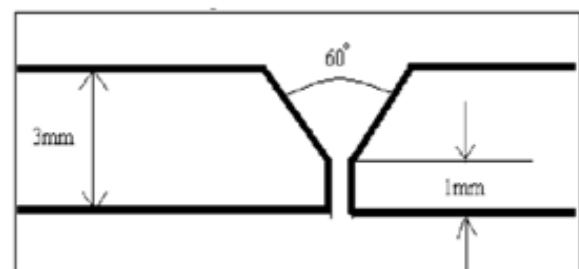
Edge Preparation of Weld Specimens [3].
